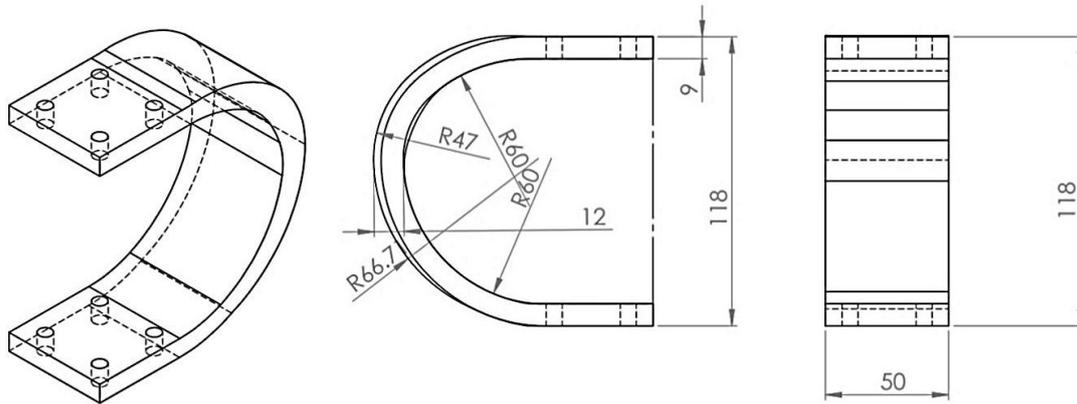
Isometric drawing of C shape used in SOLIDWORKS.
